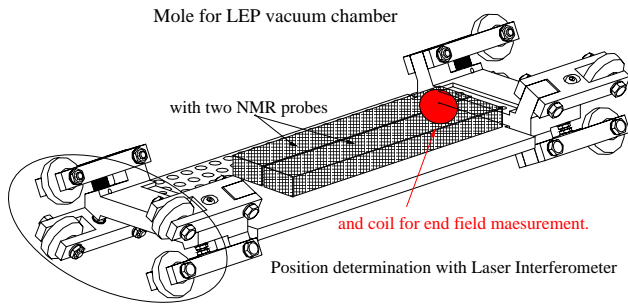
The movable NMR probe and sense coil support for the LEP vacuum chamber.
